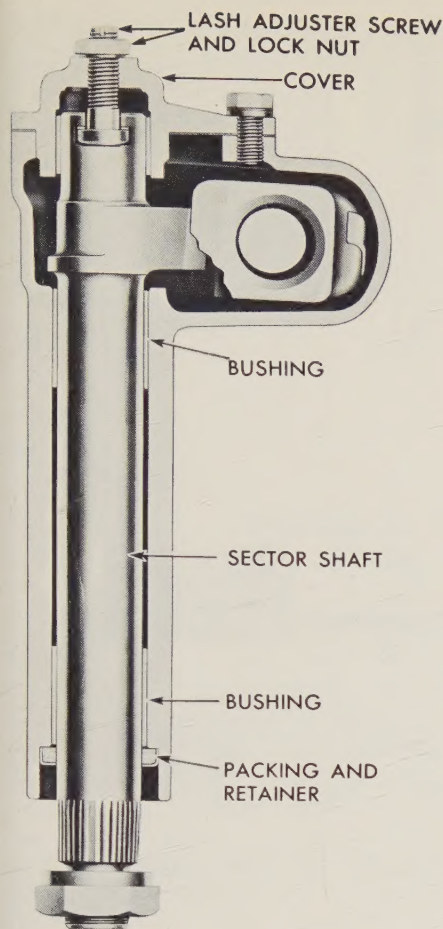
The Saginaw recirculating ball nut gear is used on a large number of American vehicles today. It is basically a screw-nut type with recirculating balls between the thread grooves and the nut. This nut has rack teeth engaging with sector teeth on the pitman shaft. This gear provides increased efficiency to accommodate the increased steering demands caused by heavier vehicles and lower tire pressure.
